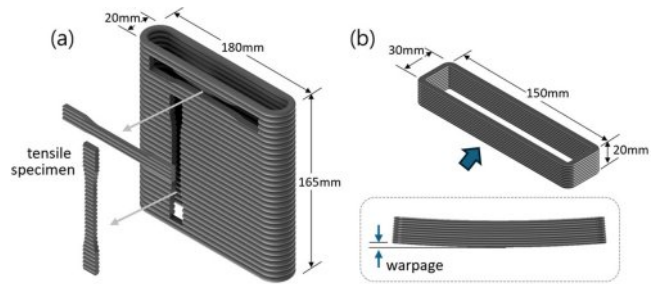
3D printing geometry and specimen for tensile test and warpage measurement.
